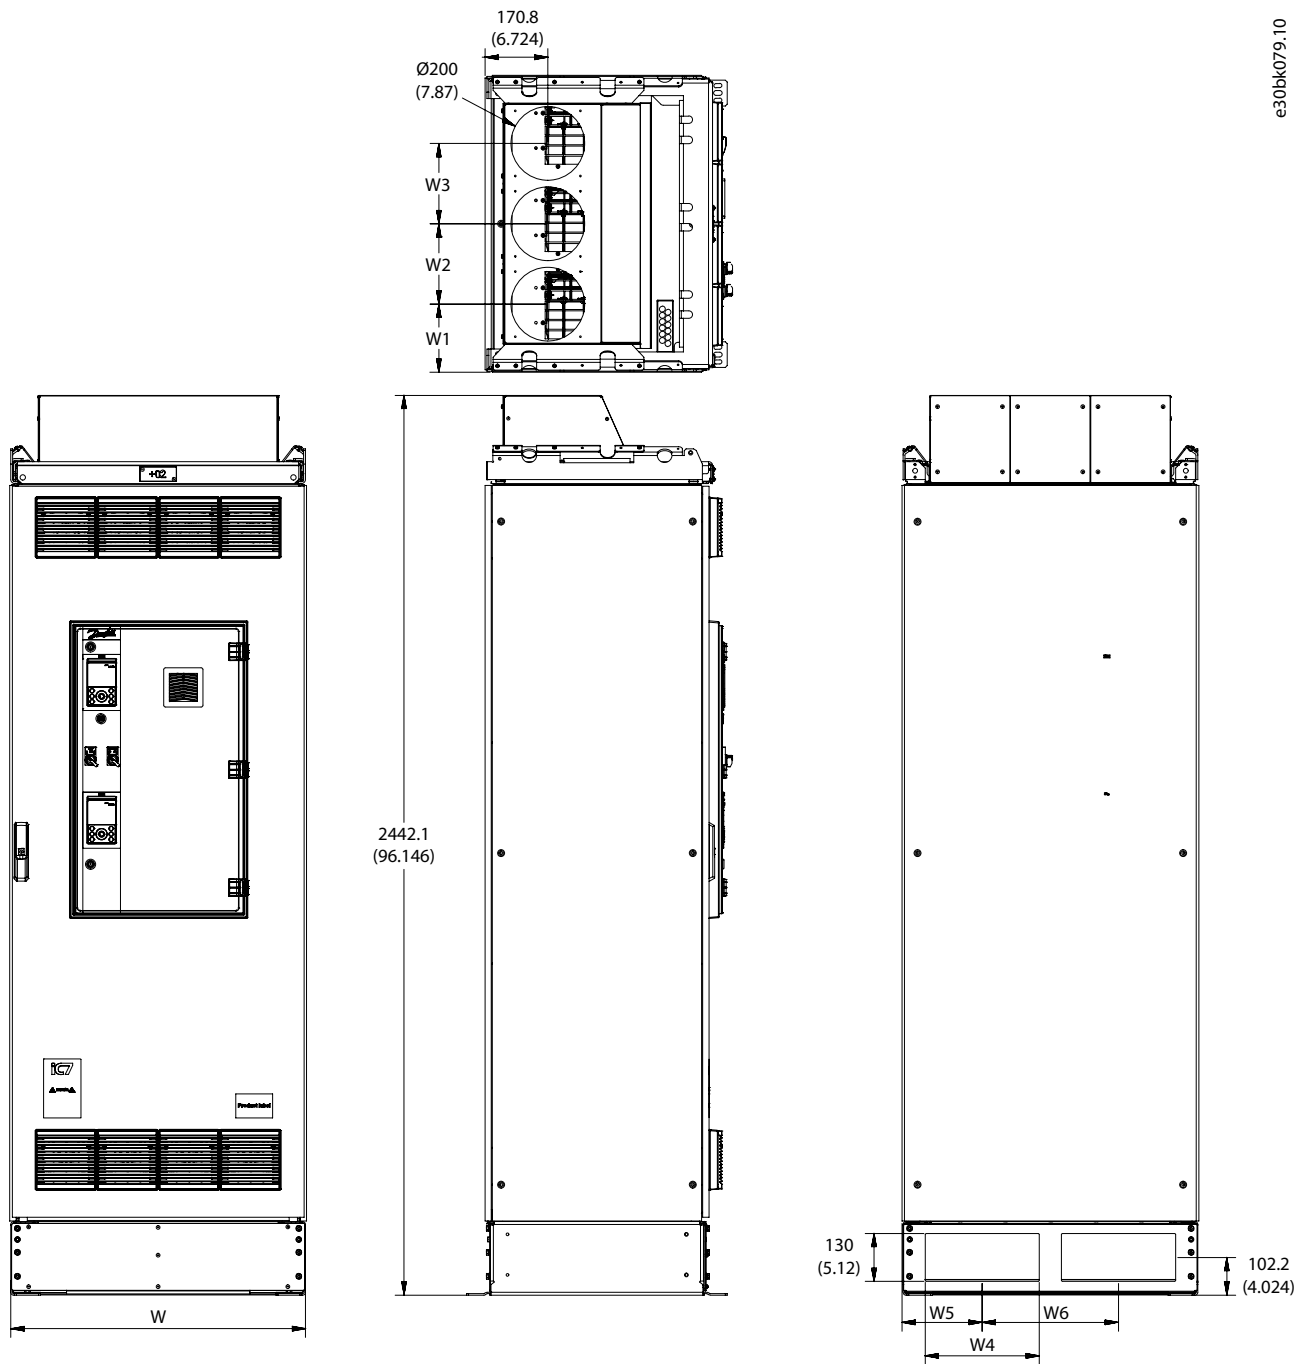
Dimensions for the Cooling Air Output Flange Option (+OAF), AE10, AE11, IE10, and IE11, in mm (in)
